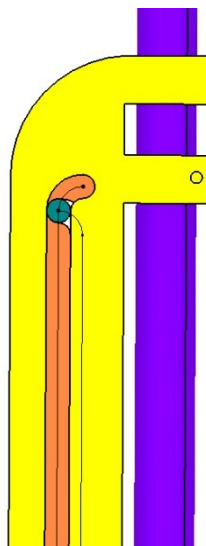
The initial position of the outer slide rod in the locking mechanism.
